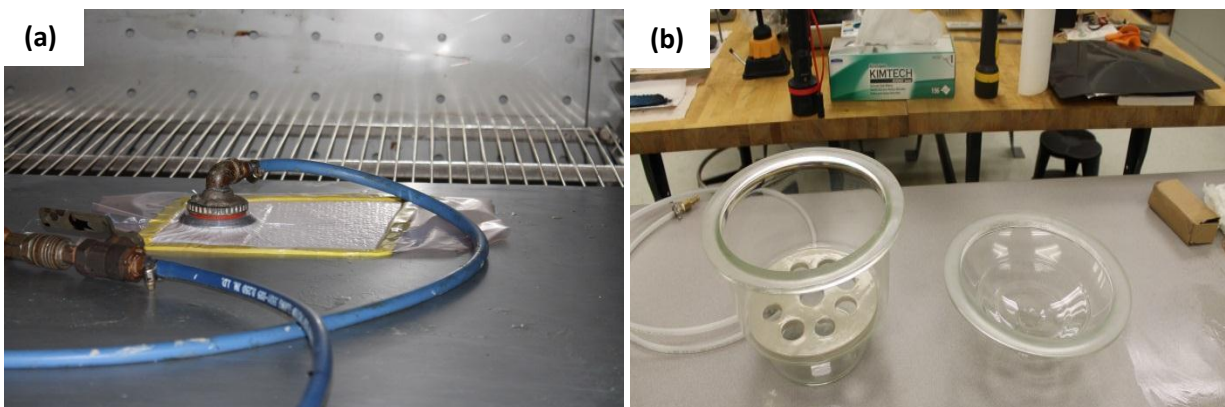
(a) Vacuum bagging (b) Vacuum desiccator.
